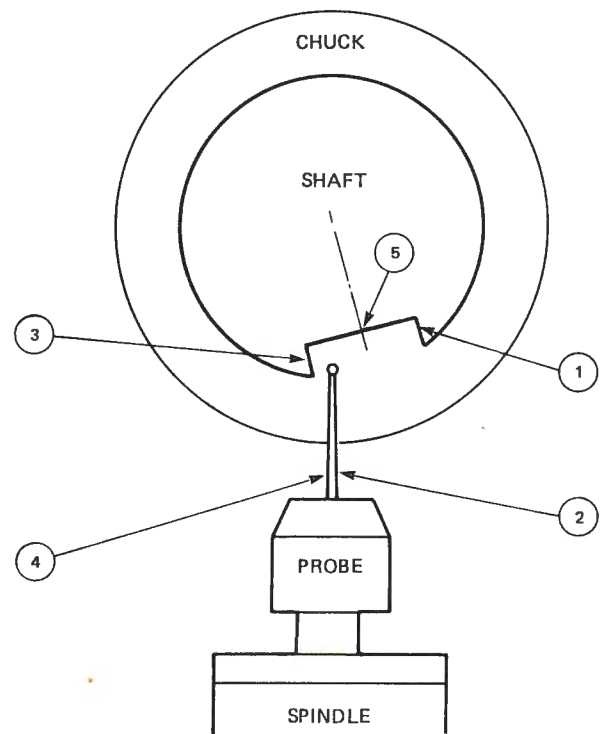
OVERHEAD VIEW OF B AXIS TABLE
